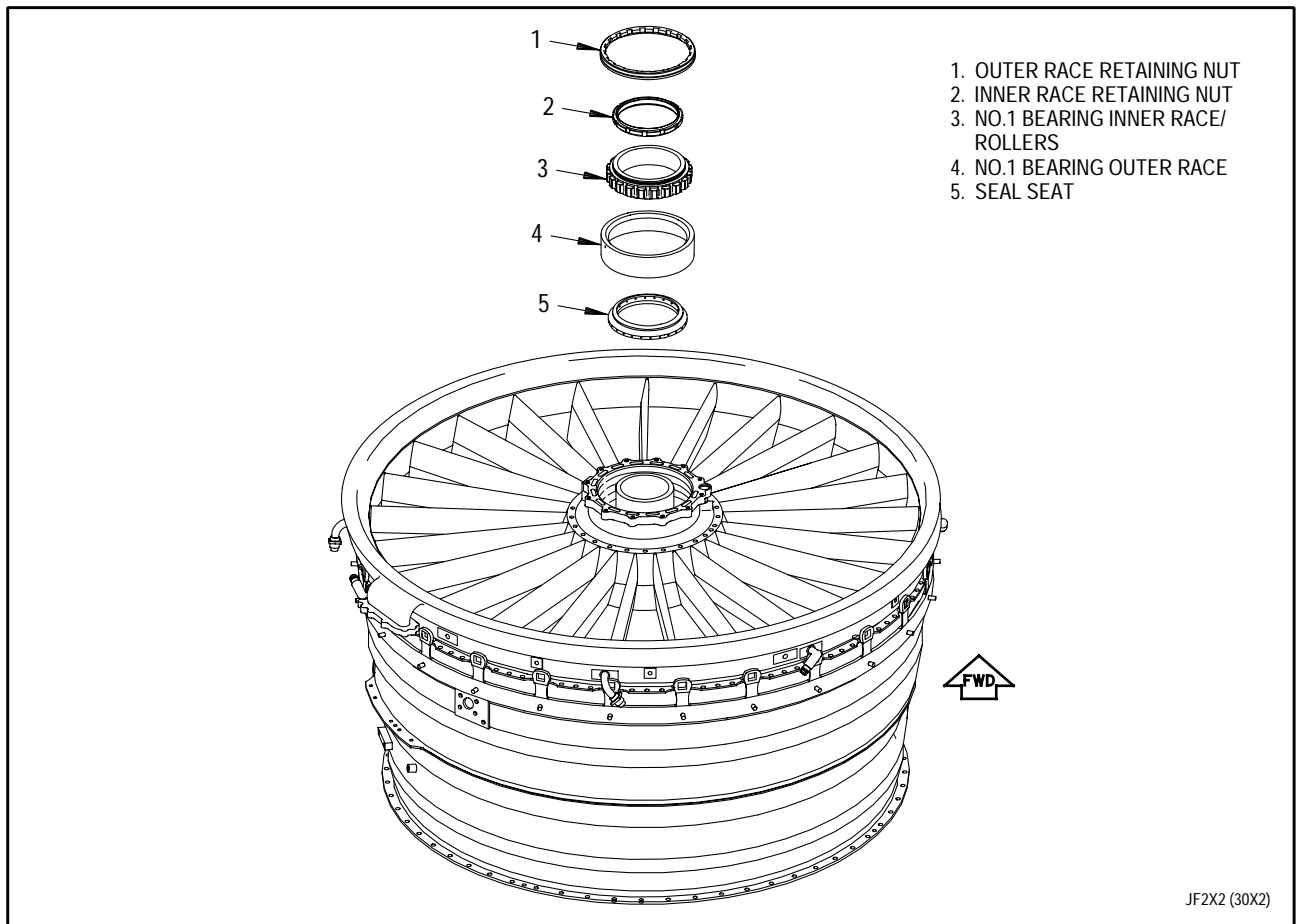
No. 1 Bearing and No. 1 Seal Seat - Installation
